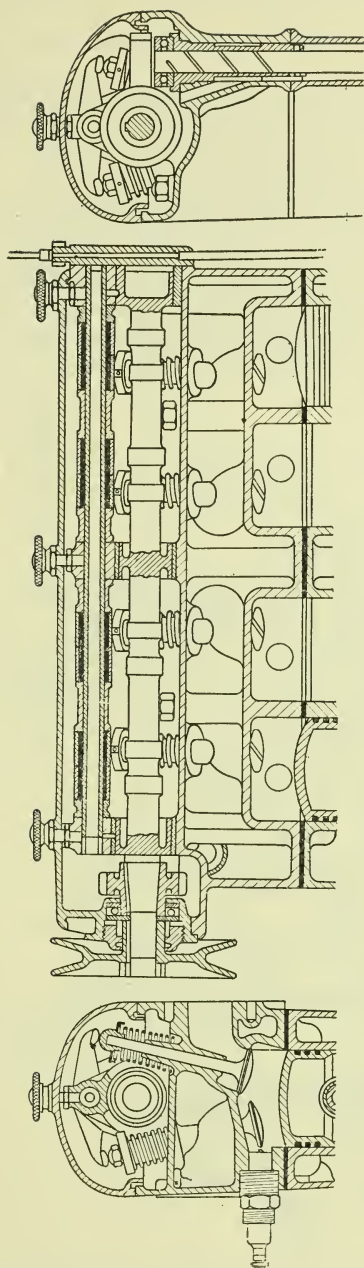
DETAILS OF THE ANSALDO ENGINE
